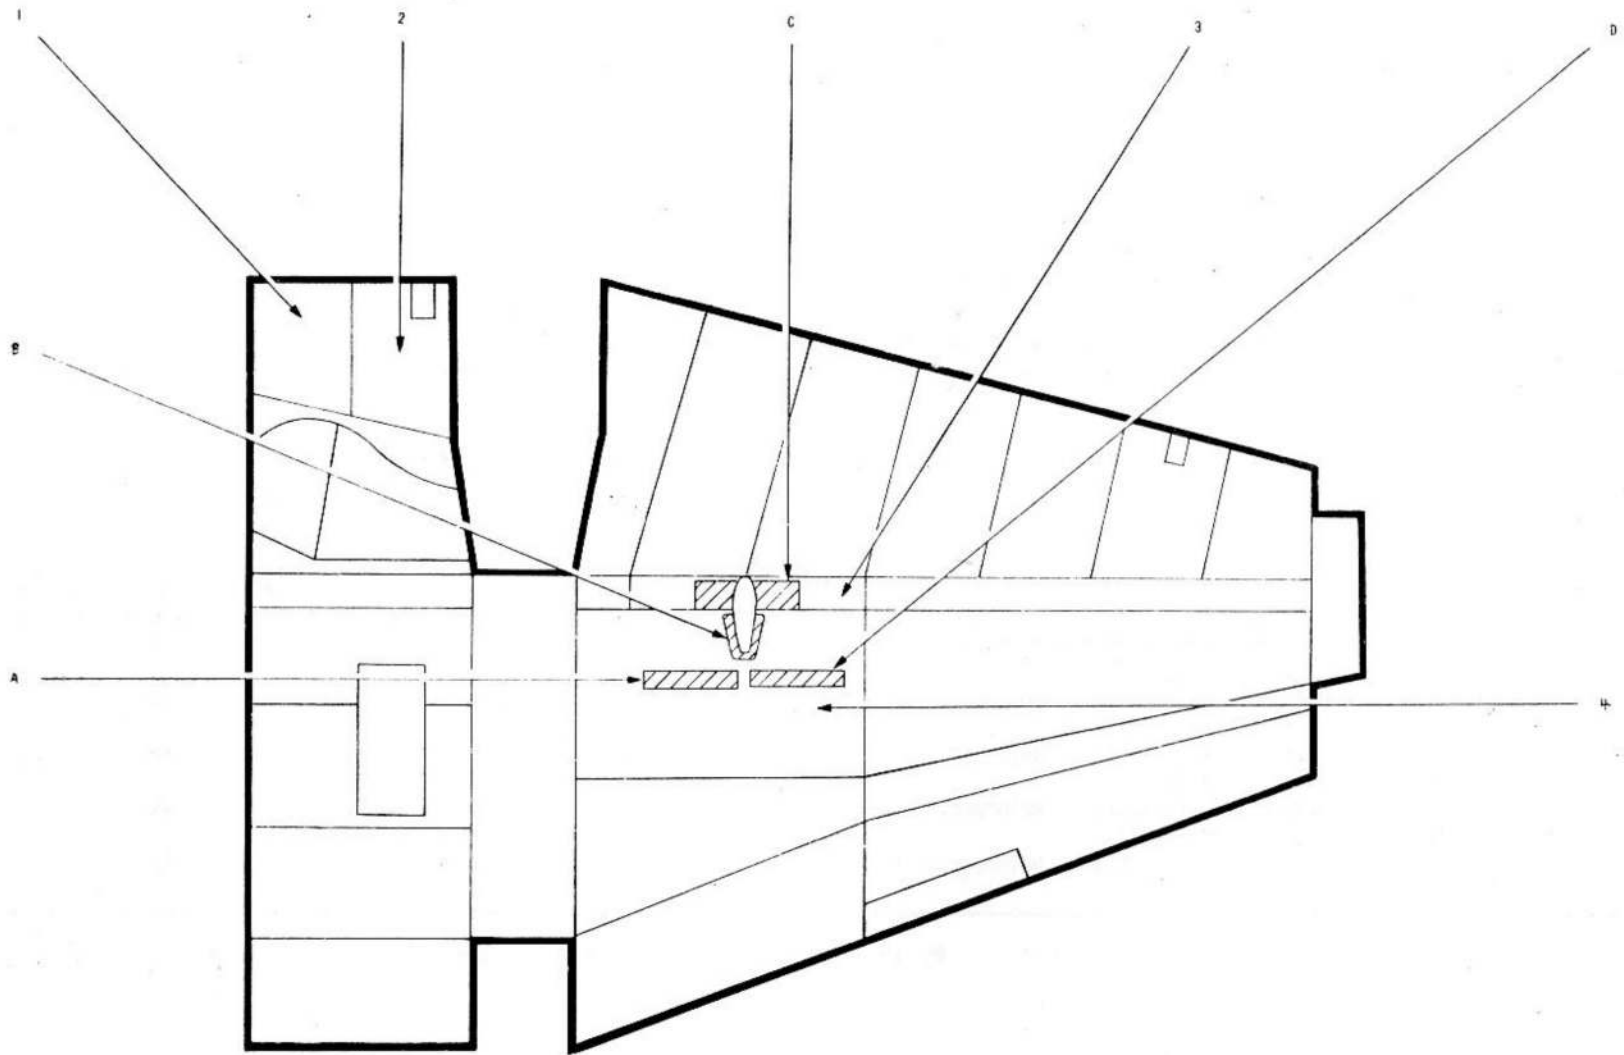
MAIN PLANE SKINNING, LOWER SURFACE
